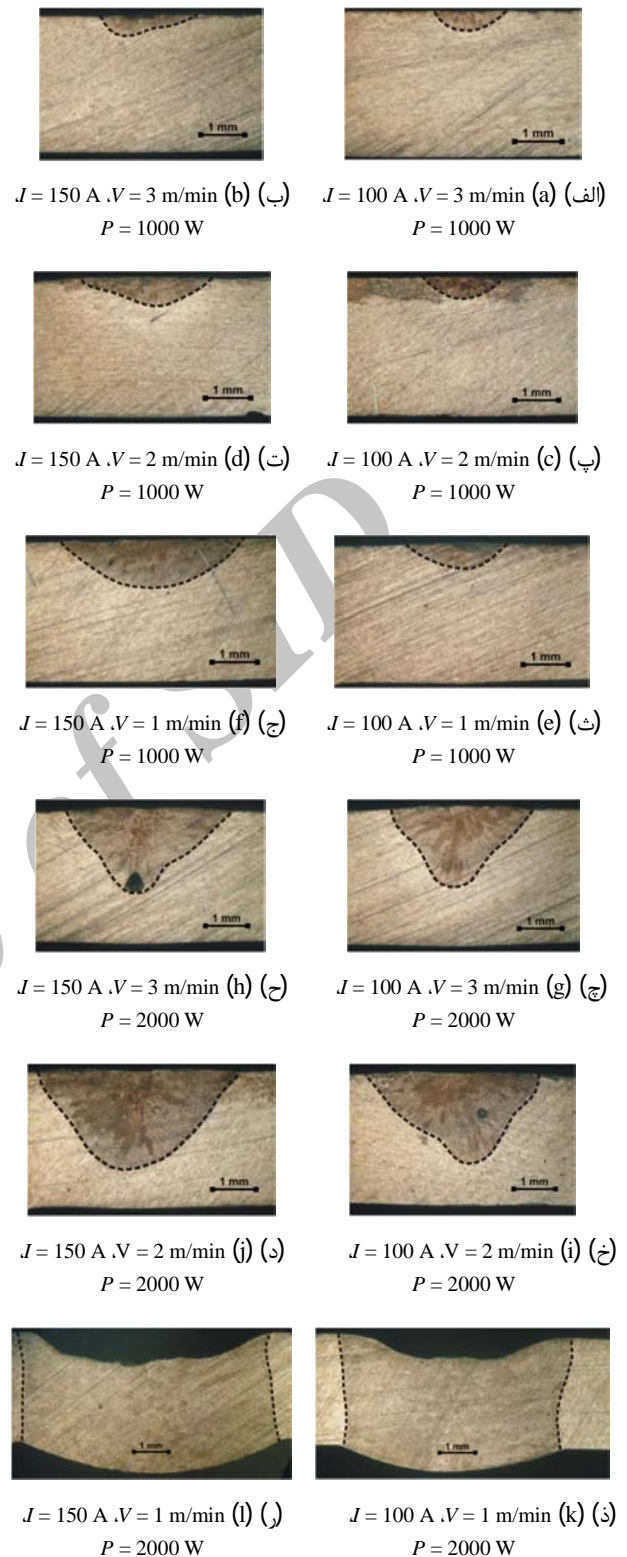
The weld cross sections for the hybrid laser-GTAW welding in various welding conditions Weld pool dimension
